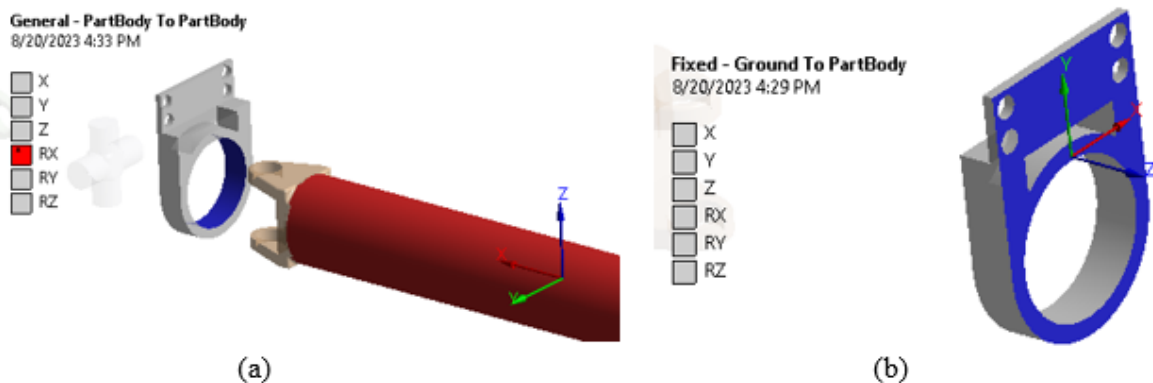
(a) Revolute joint between the drive shaft and the center bearing, (b) Fixed joint between the center bearing and the vehicle's frame
